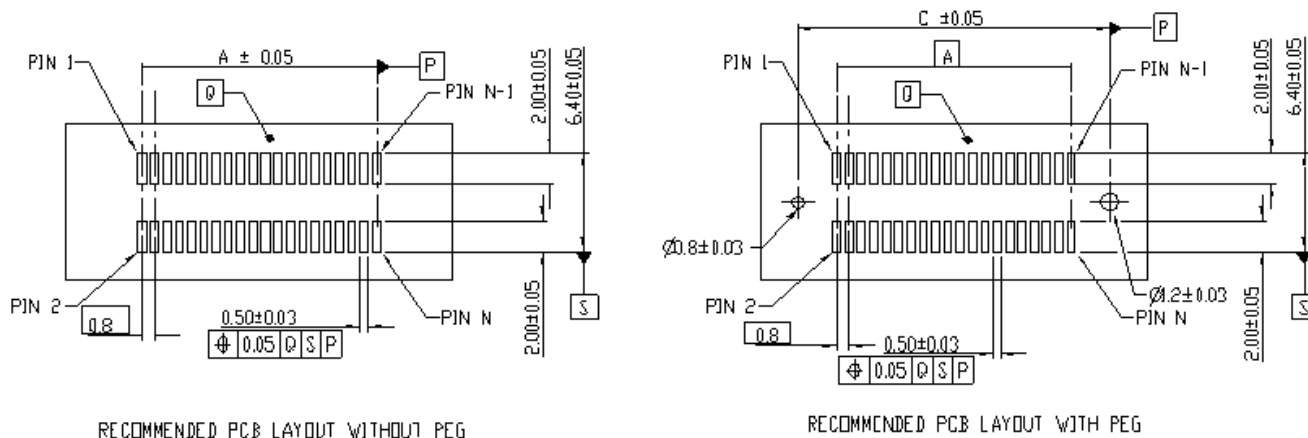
Recommended PCB layout for Receptacles 1 and Plug 1 to 4.
